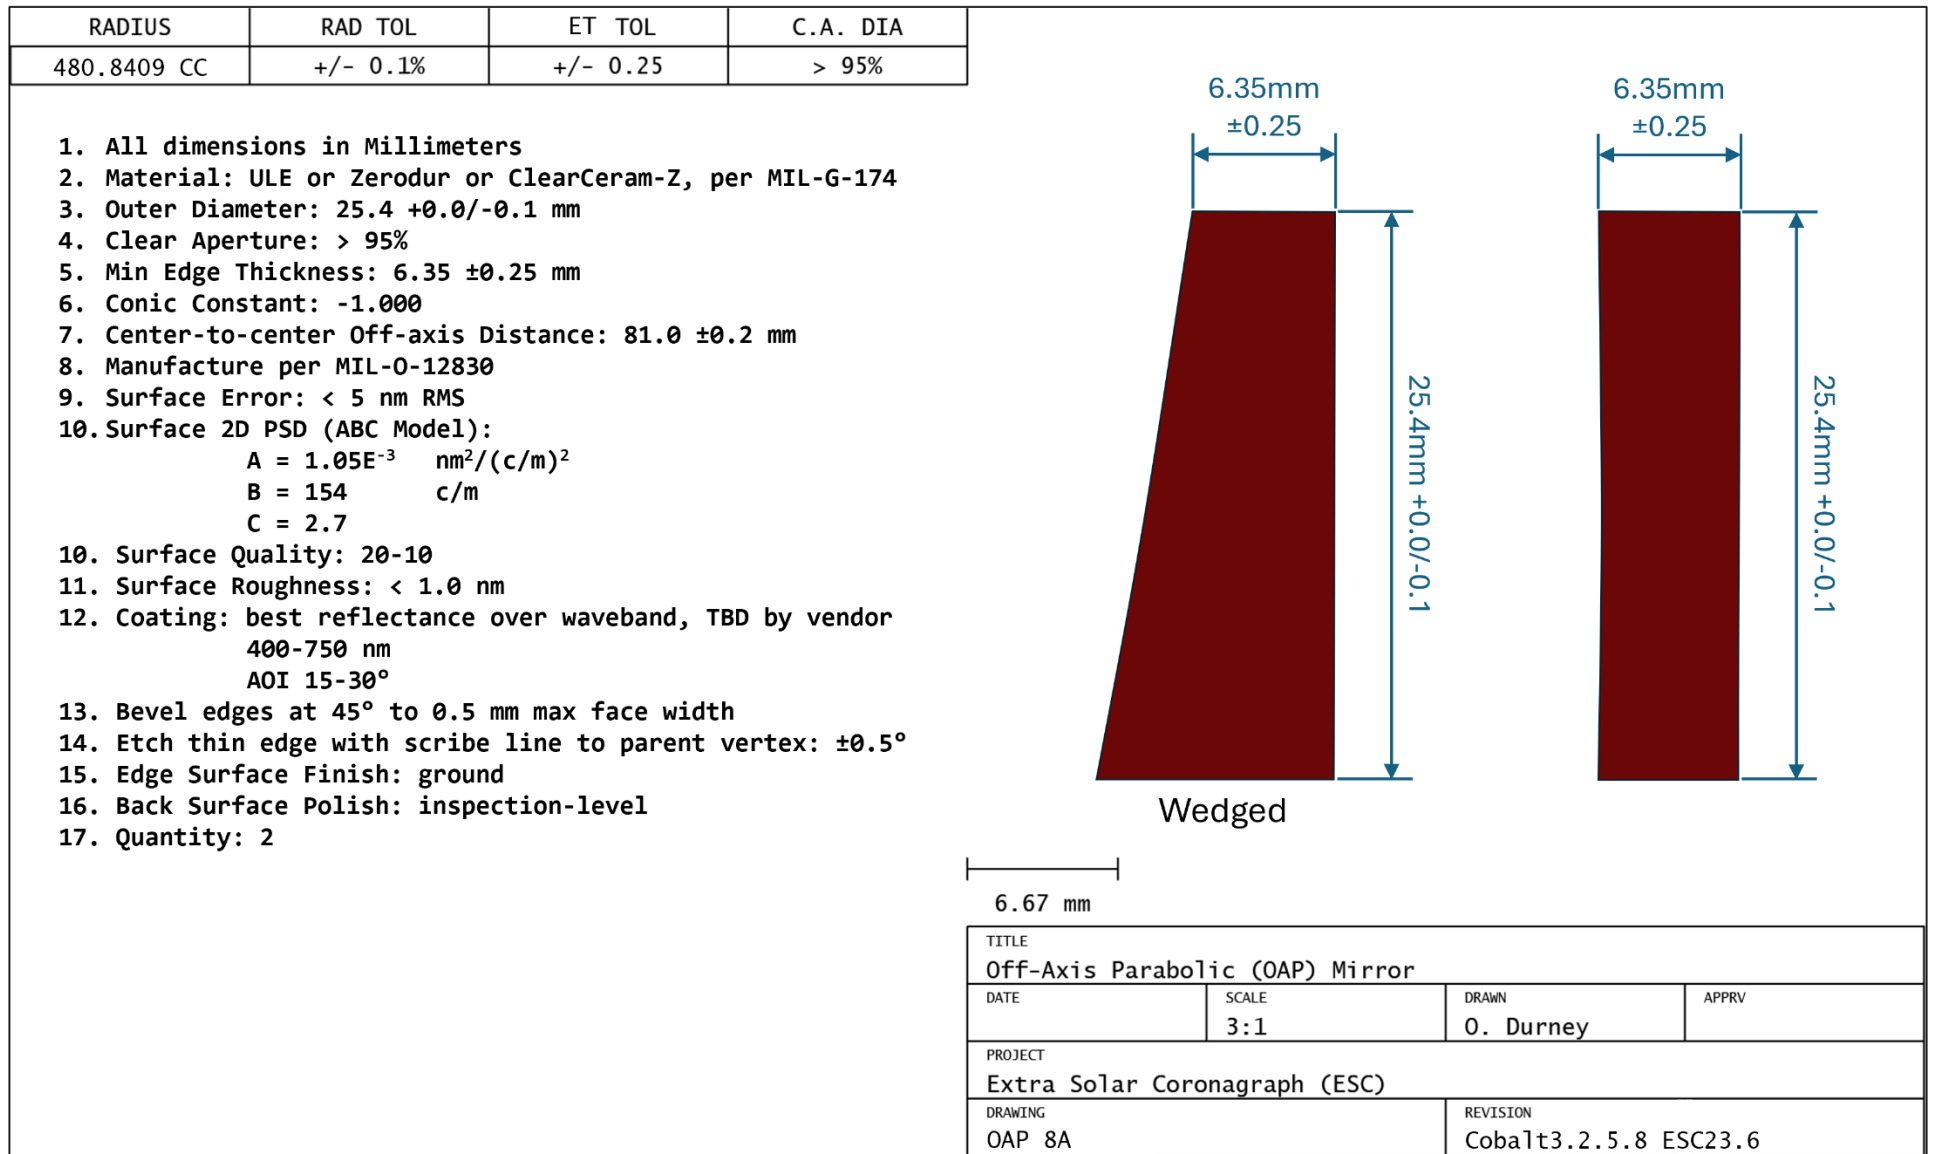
Off-axis parabolic mirror, OAP 8A drawing
